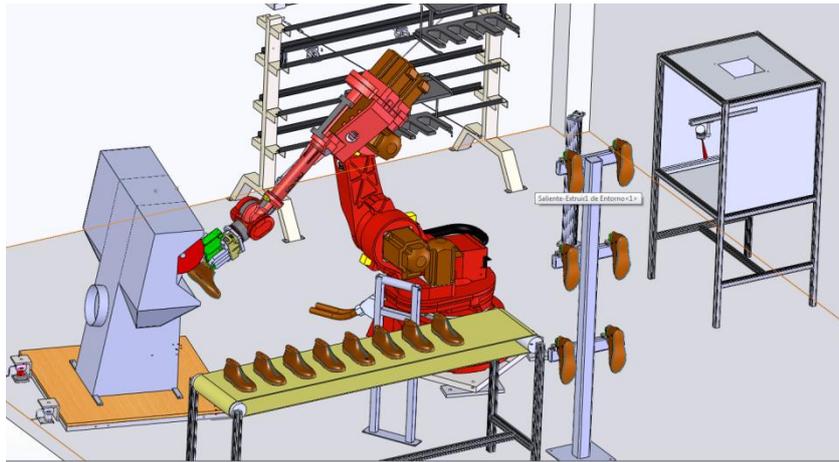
Combined operations layout set-up at INESCOP: 3D drawing
